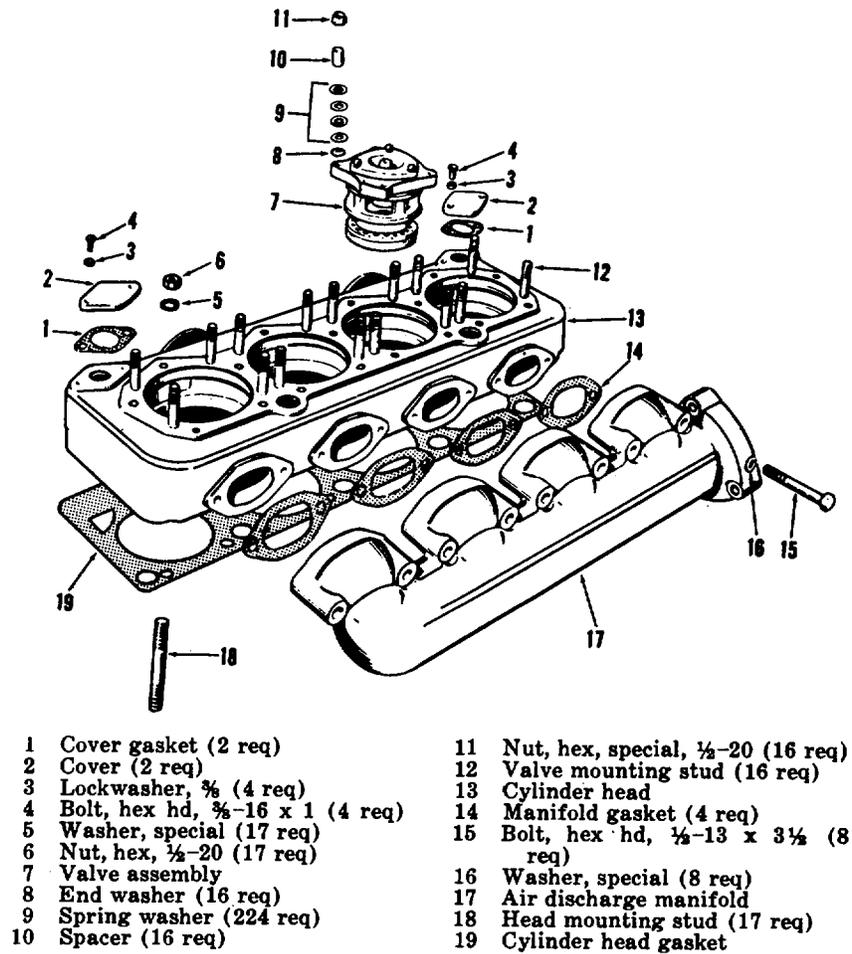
Exploded view of compressor cylinder head, valves and manifold.
